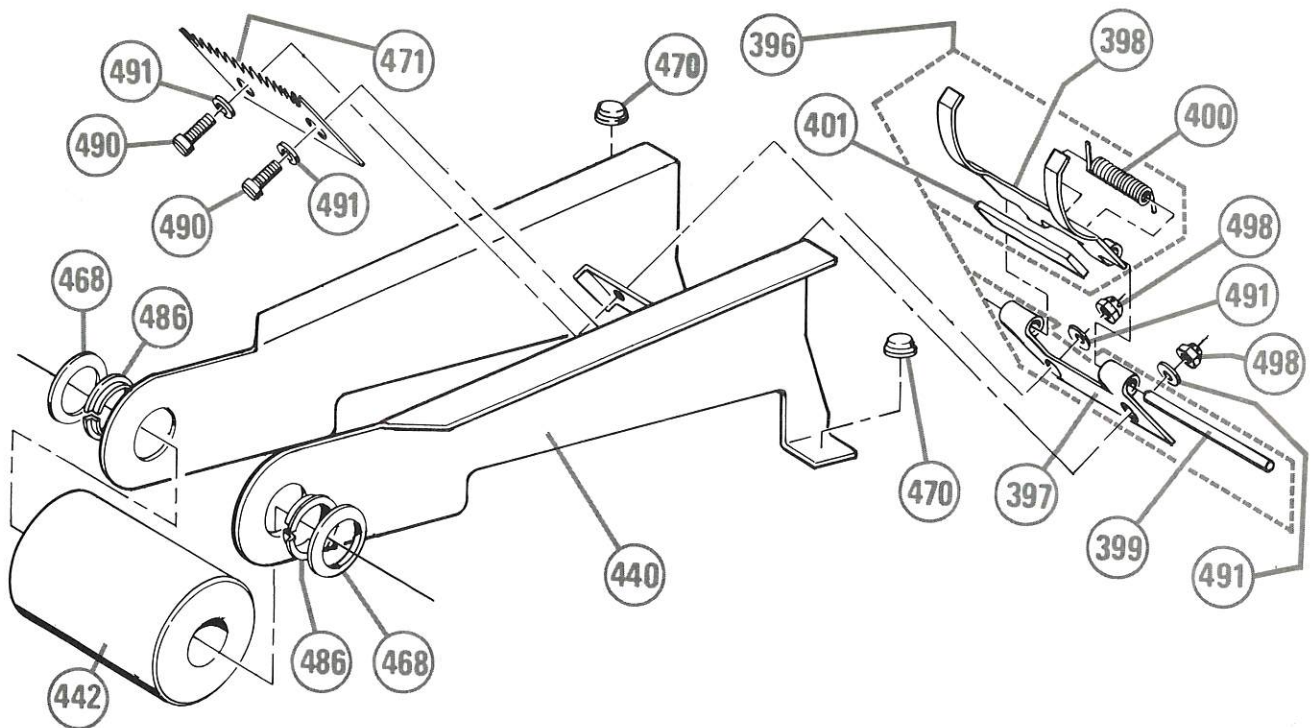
CUT-OFF ASSEMBLY - LOWER HEAD
